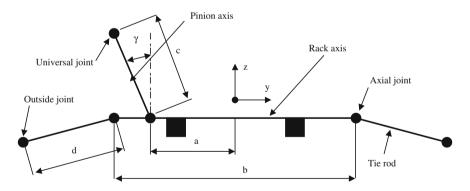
Typical outlines of a rack-and-pinion gear
